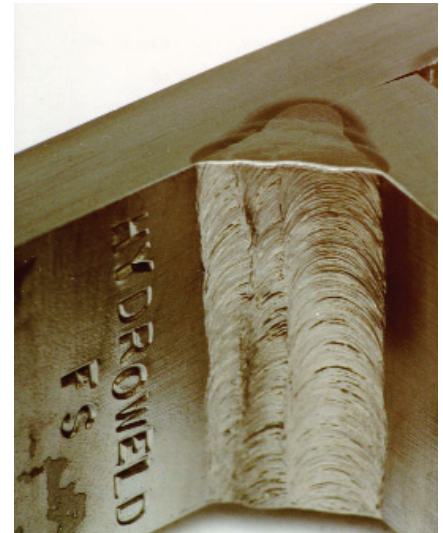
Macro of a multipass wet welded fillet weld.
